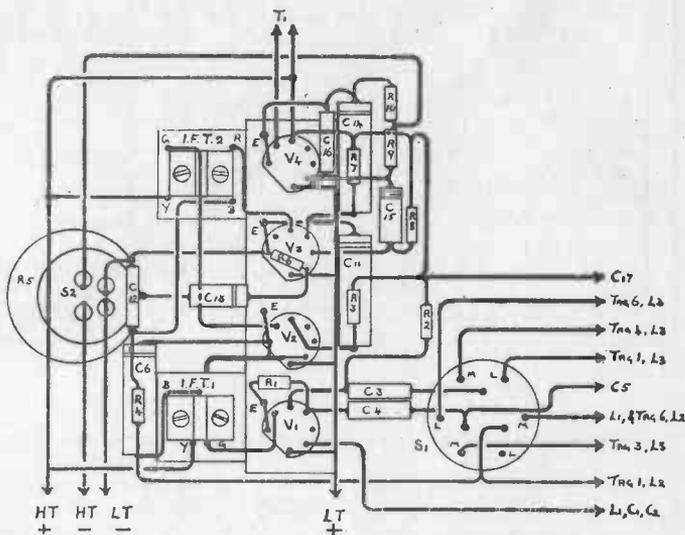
Point-to-Point Wiring Plan of the "Two-Band Super"
